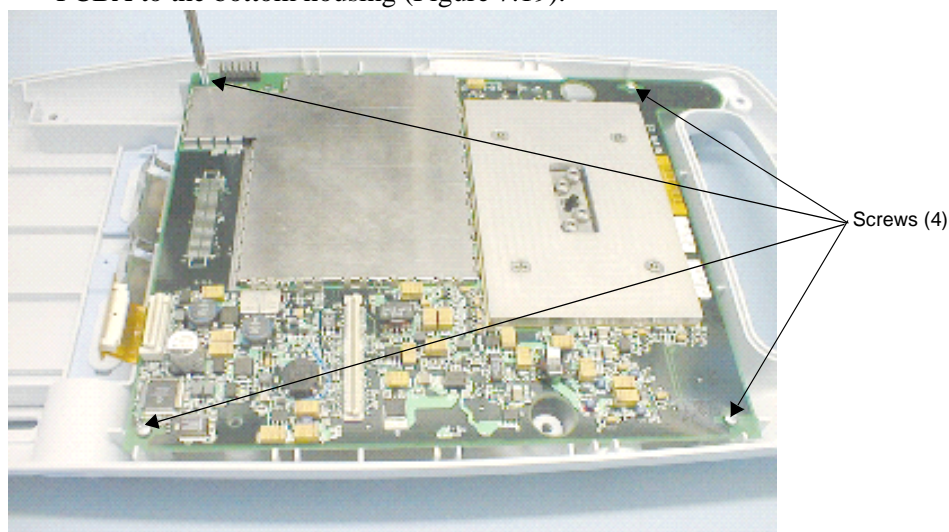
Removing the Main PCBA from the Bottom Housing
